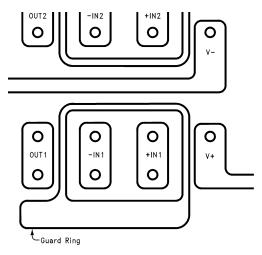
Example of Guard Ring in P.C. Board Layout Typical Connections of Guard Rings
